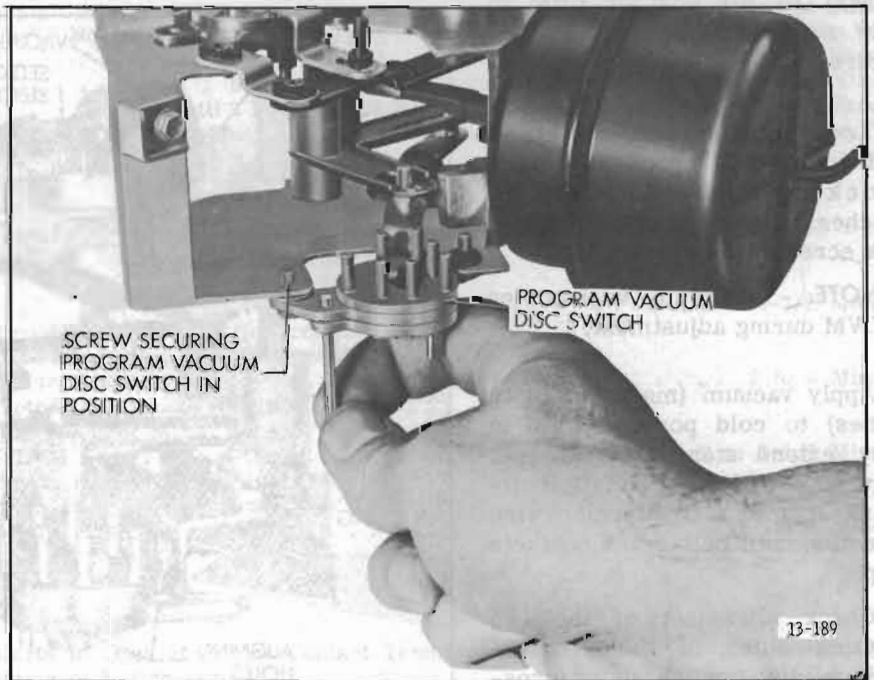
Checking Alignment of Program Vacuum Disc Switch Aligning Holes (45-46-48000 Series)
